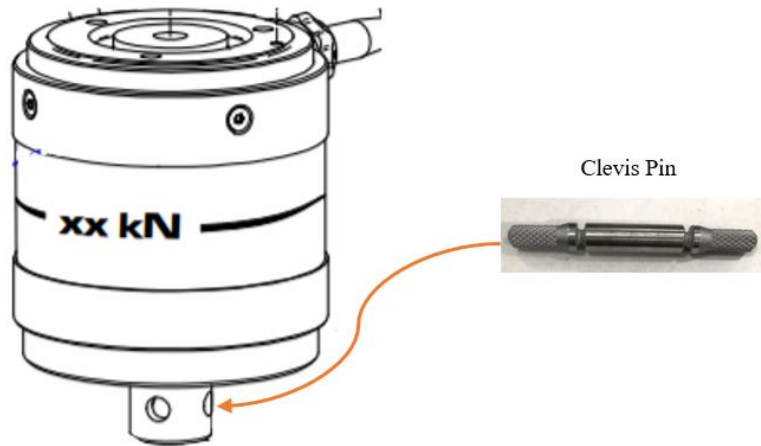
Load Cell and Clevis Pin Diagram [27] © Illinois Tool Works Inc.
